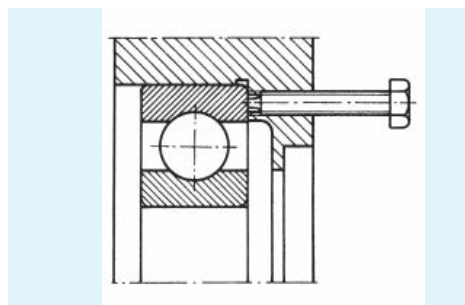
Ball bearing abutment with threaded holes for pushbolts
